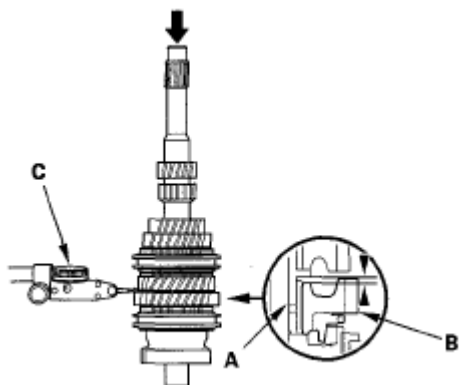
Measuring Clearance Between Distance Collar And 5th Gear With Dial Indicator
